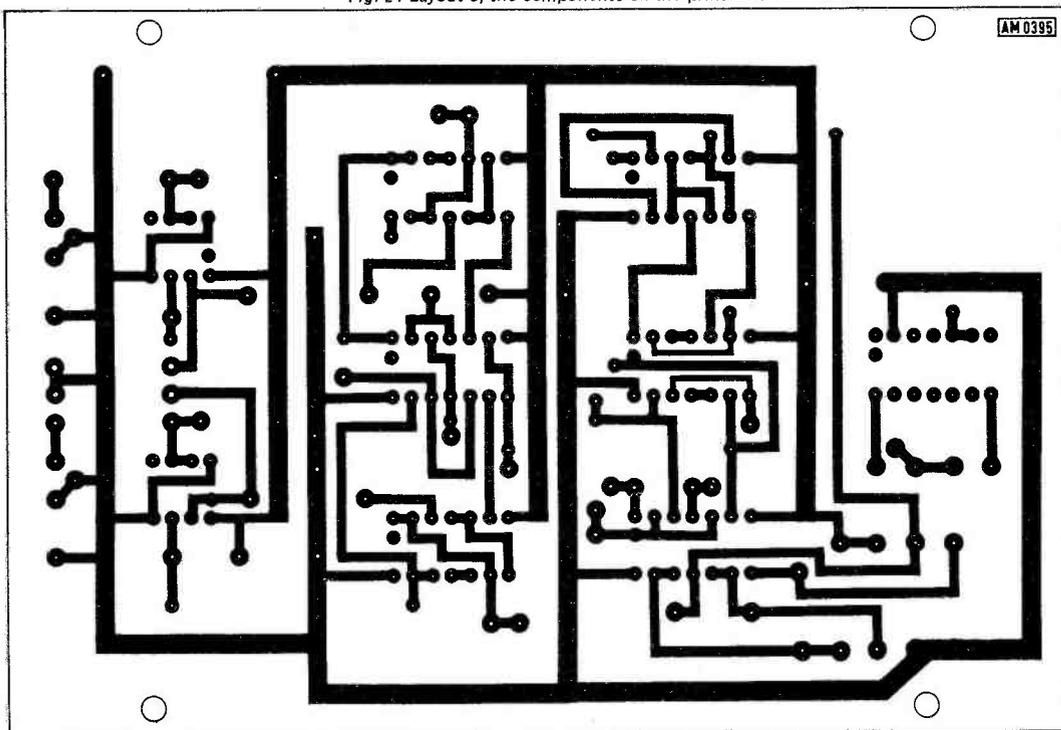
Full size printed circuit layout for the Tele-Tennis Ball Speed Control
